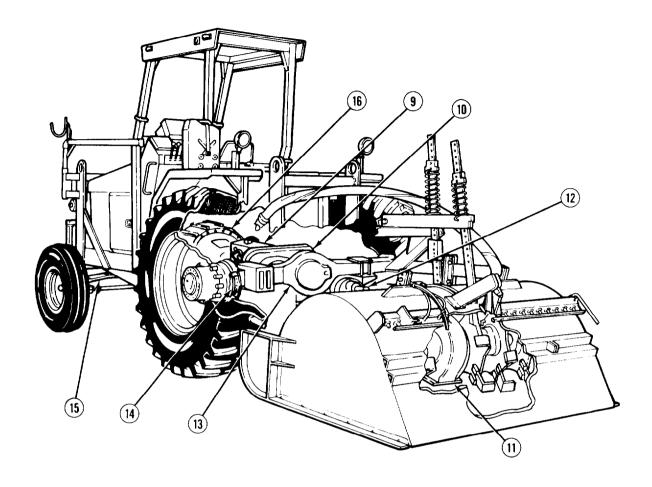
Mixer, Rotary Tiller - Major Components (Sheet 2)
